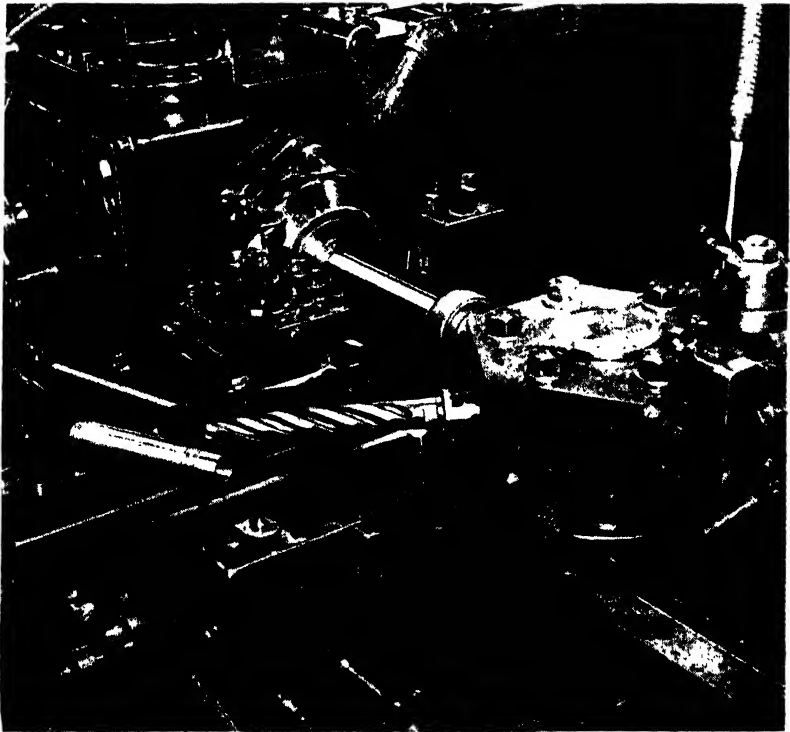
Rough-turning the Shank End of Wing Terminal Forgings
